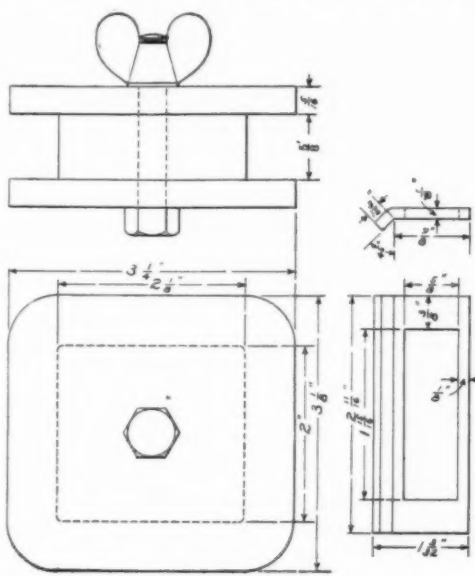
COIL WINDING FORM AND COTTON DAMPER.
